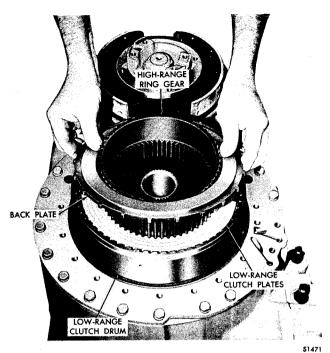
Installing low-range clutch back plate (-1 model)
